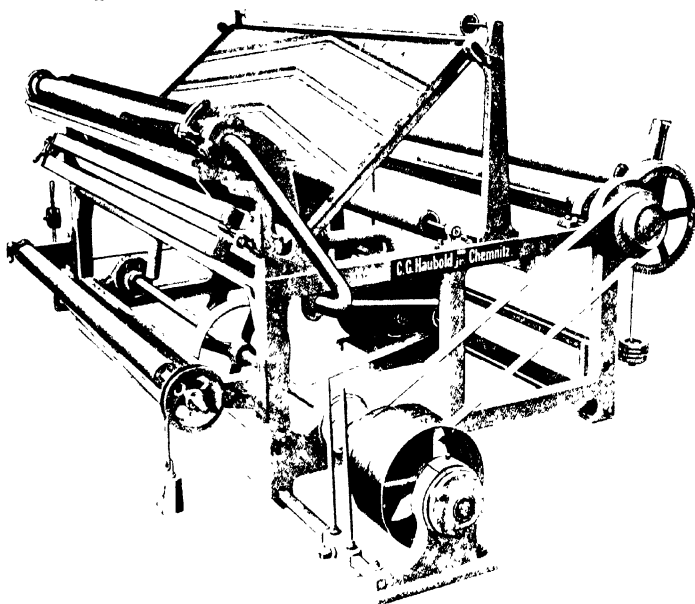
Damping Machine for Linen and Jute Fabrics.
